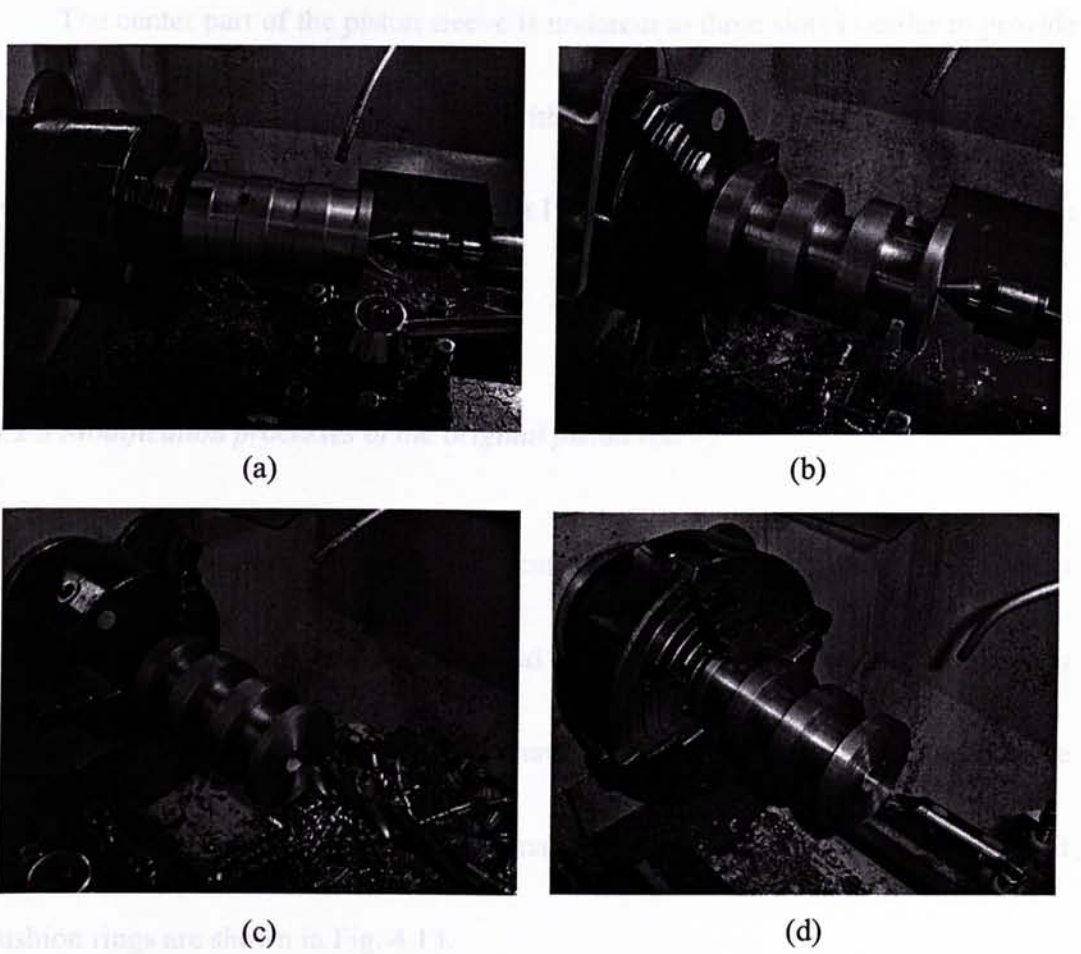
(a) The piston sleeve is about to cut (b) The three slots have been cut (c) The hole at the center is being drilled (d) Another boring tool is used to bore the hole with precise dimension.
